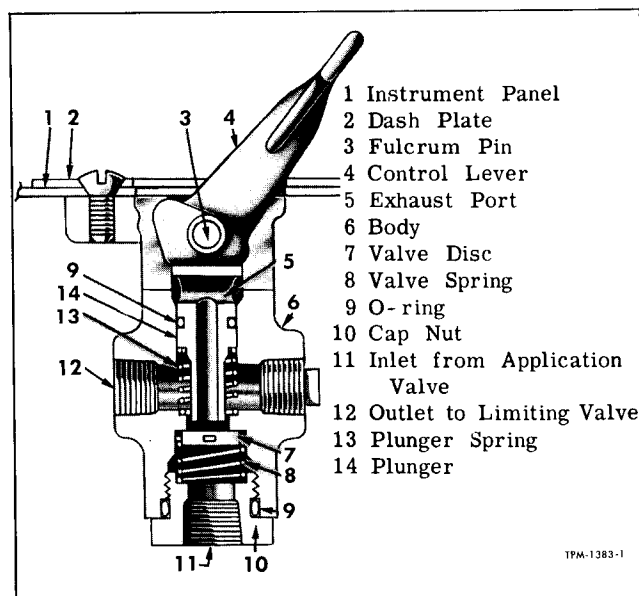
Two-Way Control Valve (Also I.C.C. Valve)
